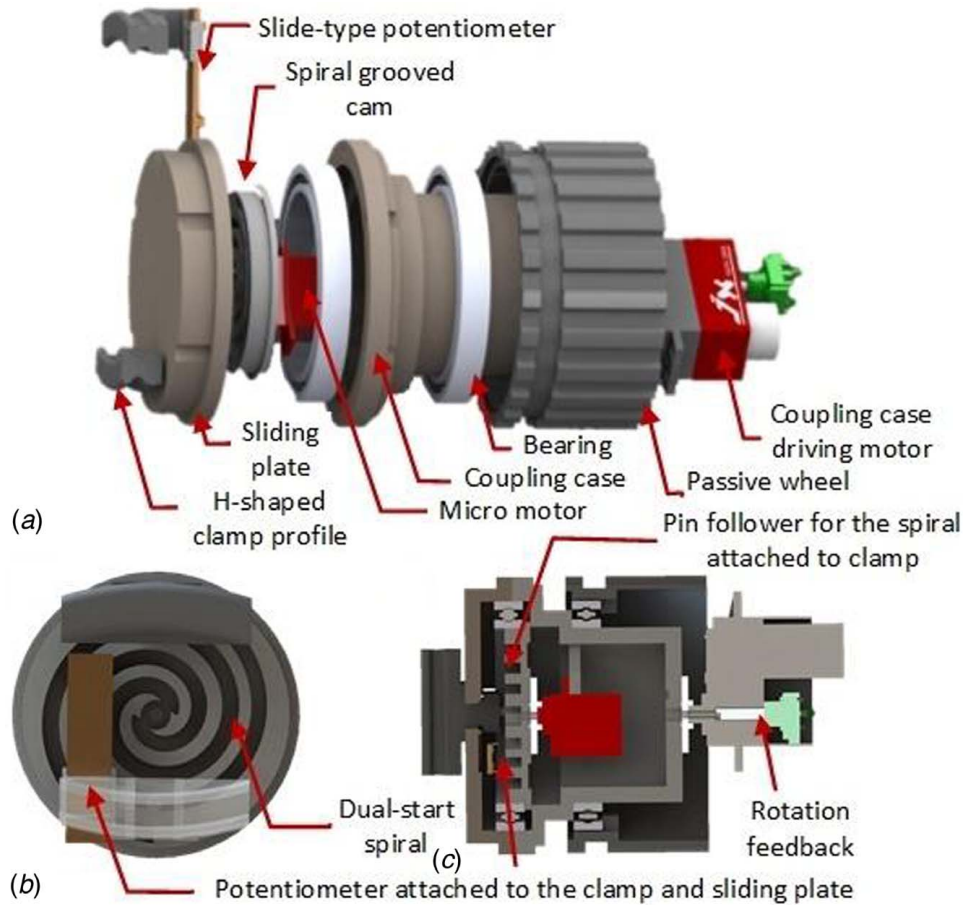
(a) Exploded view of the docking mechanism, (b) spiral grooved cam profile, and (c) compact view of the joint assembly
